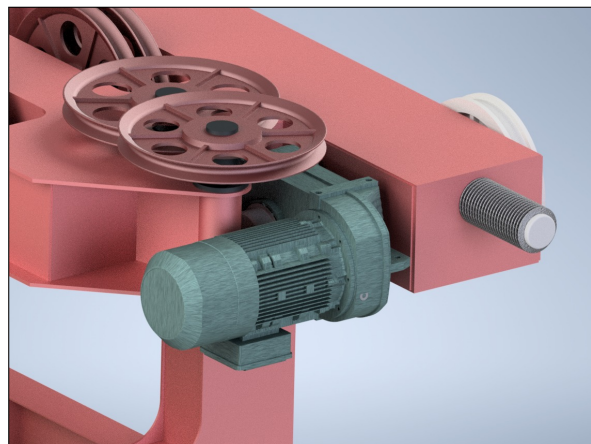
Gearmotor implemented in the trolley A frame. In all four corners of trolley A, a gearmotor is installed.
